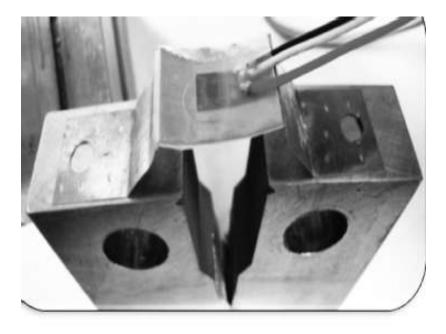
Dynamically loaded CTS sample with low mass extensometer still attached; LME welded to sample front face
